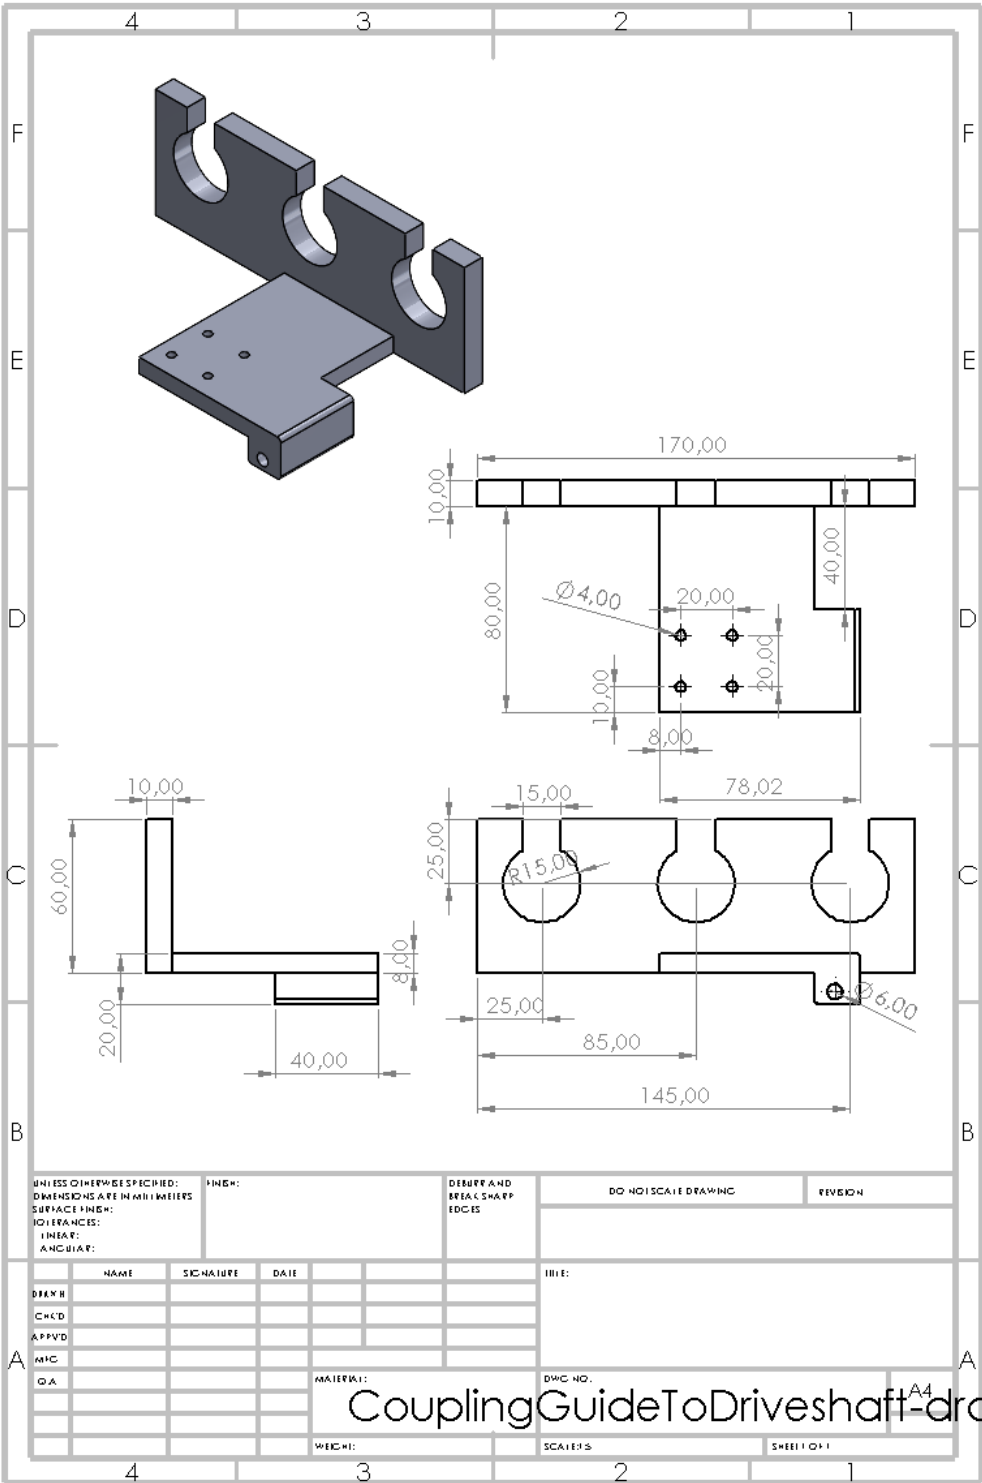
Technical drawing of the coupling from the linear guide to the drive shaft of the hydrodynamic test-setup.
